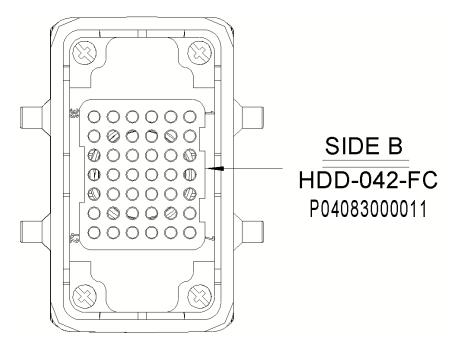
Encoder wire connector on manipulator side of ARC4-50/ARC4-75 control cabinet
